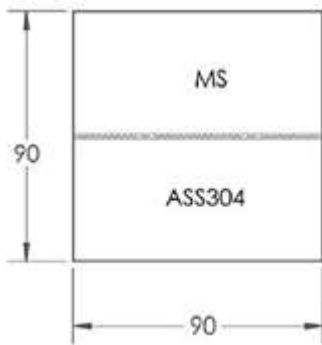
Specimen of 90° Sheet metal welded blanks for Erichsen Cup test
